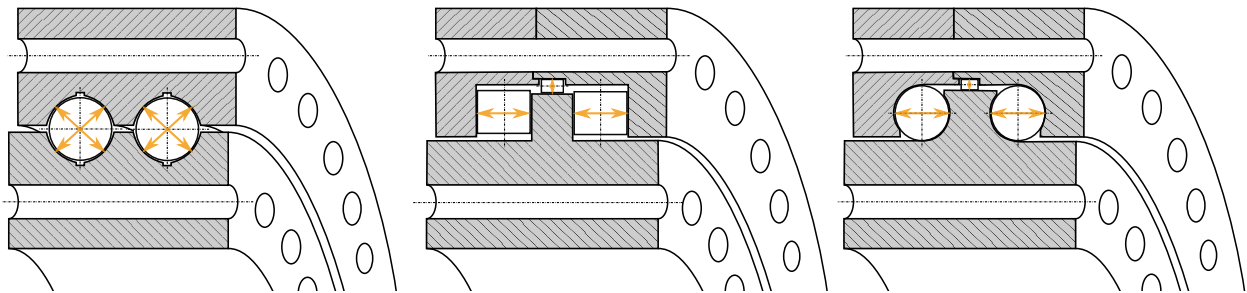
Pitch bearing types: Four-point contact (left), three-row roller (center), T-Solid (right)
